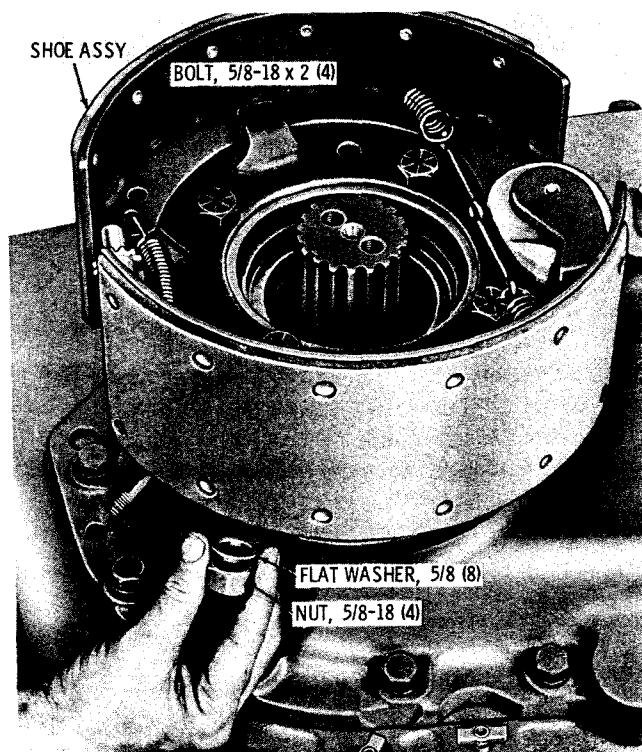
Installing nut onto bolts which retain brake shoe assembly
